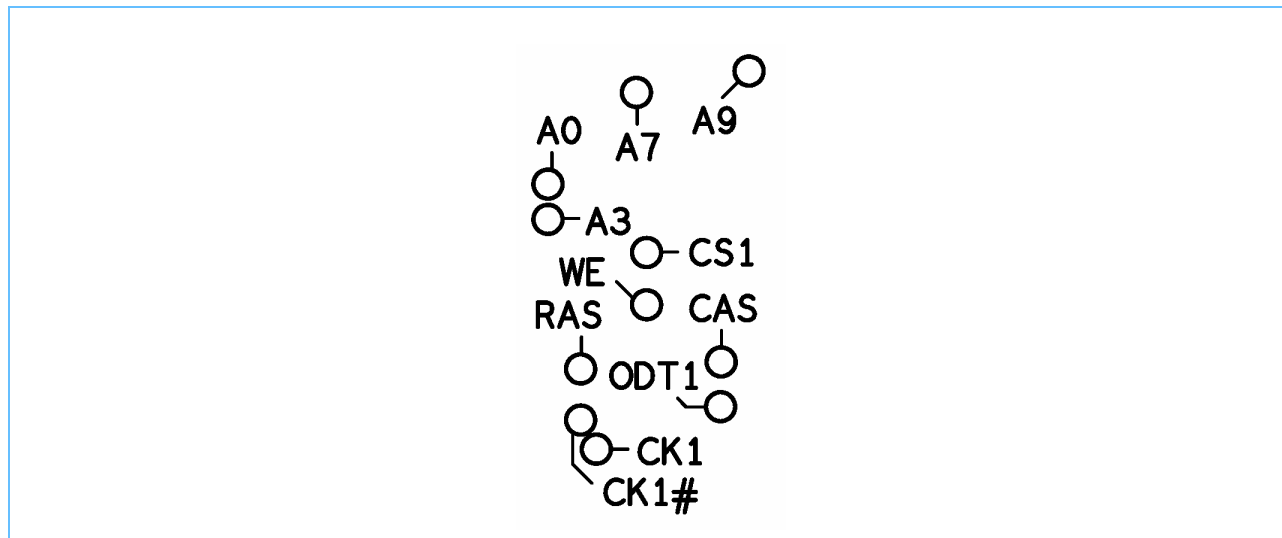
Test Point Identification (Raw Card Version E): Front Side View
